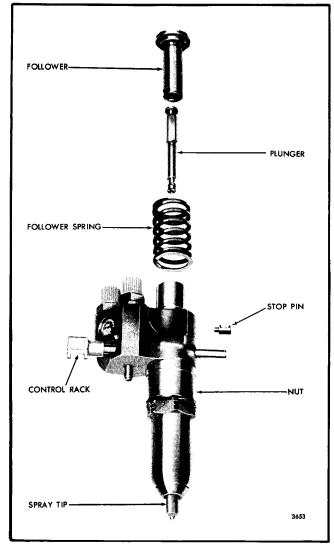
Injector Plunger, Follower and Relative Location of Parts
